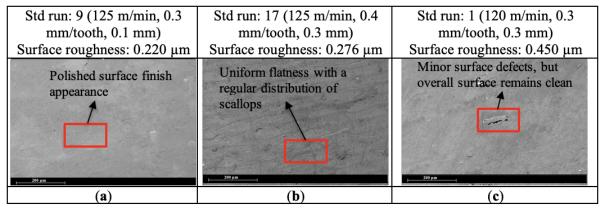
Machined surfaces with fine surface finish (0.220 μm-0.450 μm)
